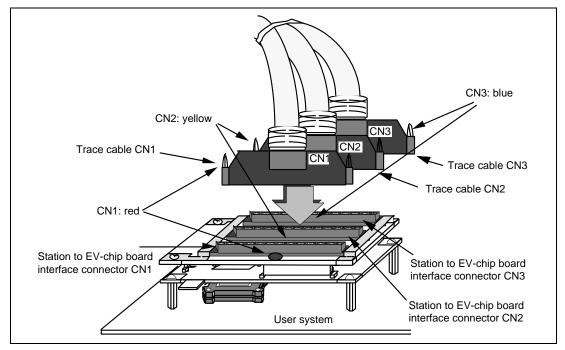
Connecting Trace Cables to the EV-Chip Board
